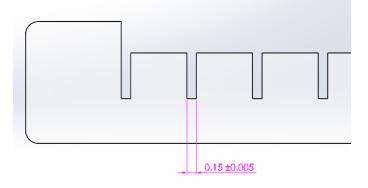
Dimension and tolerance for slots in the slats which form tray compartments.
